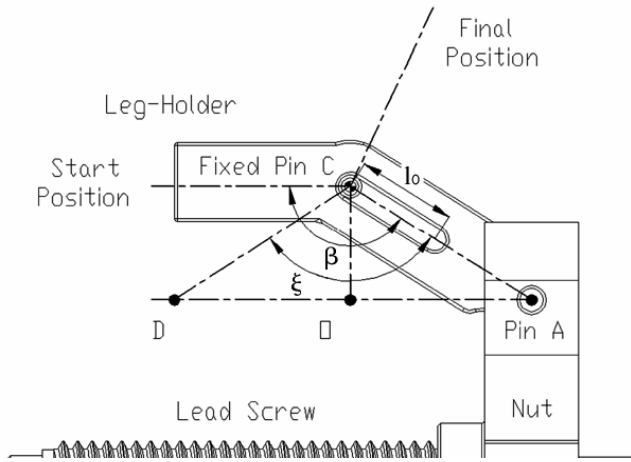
Side view of the slot-follower mechanism showing all its design parameters.
